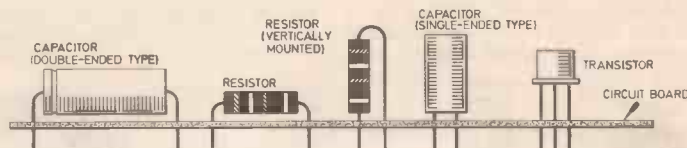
Side view of circuit board showing component leads prior to soldering and clipping.
